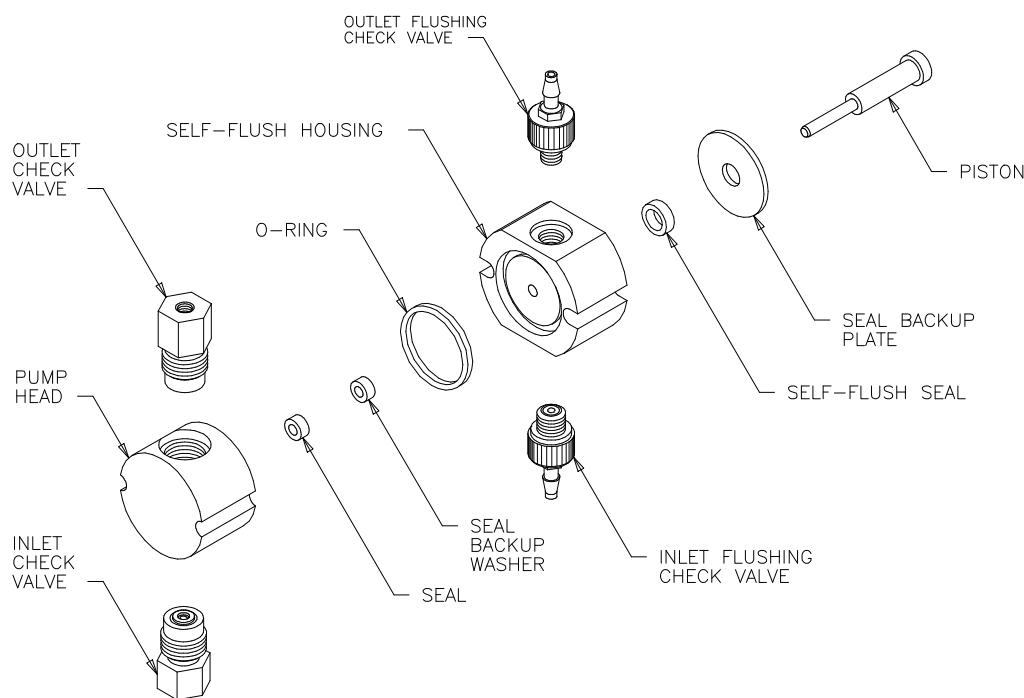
Stainless Steel Self-Flushing Pump Head Assembly
